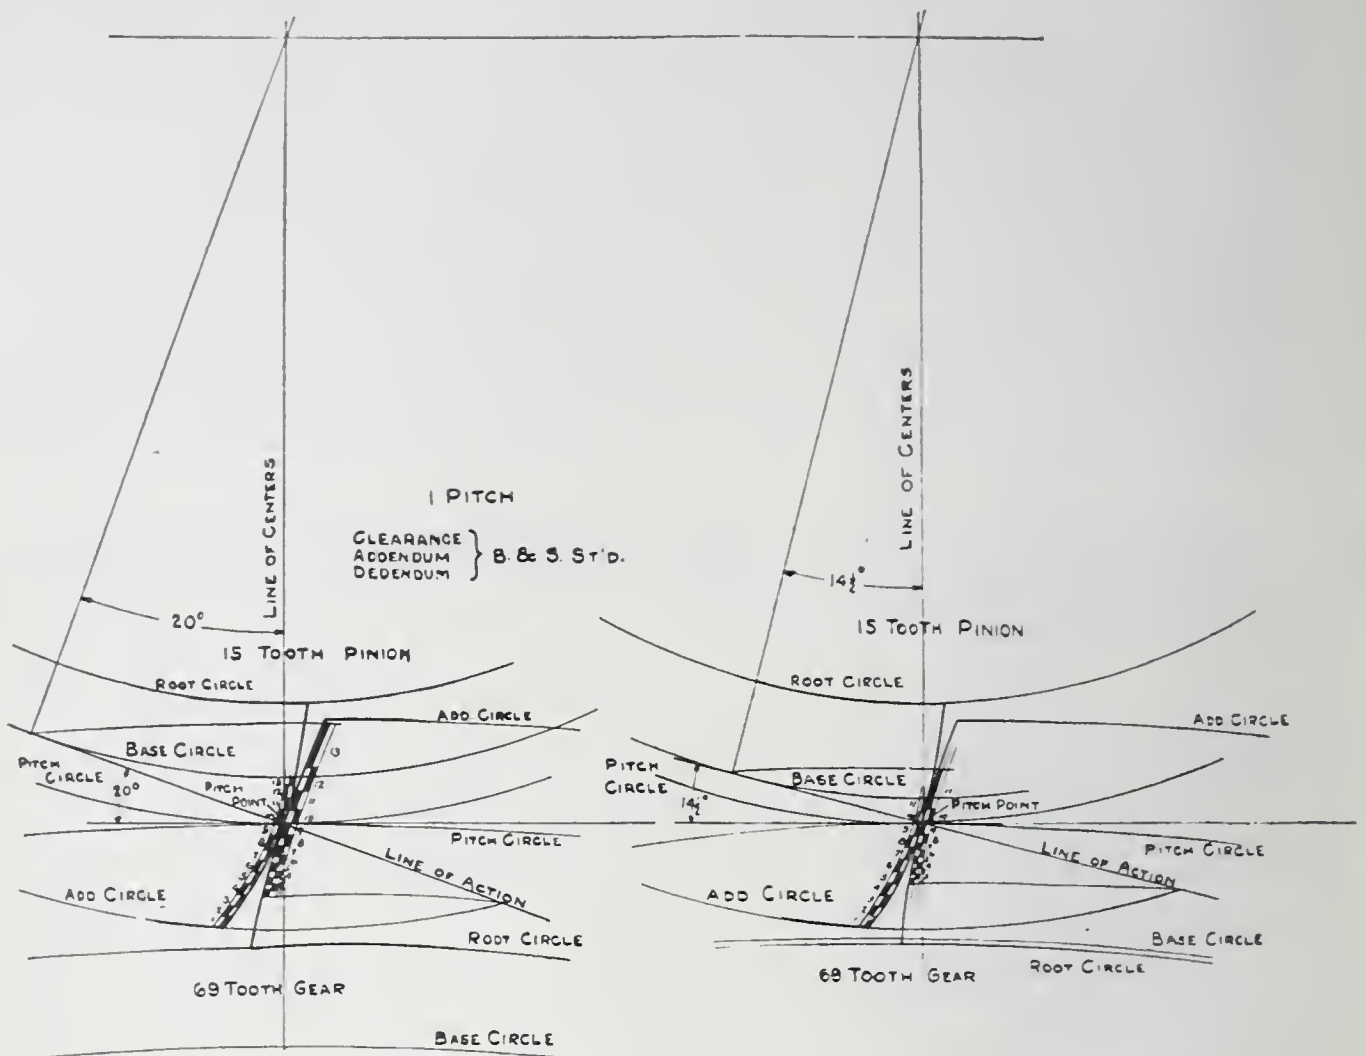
Outlines and Positions of Involute Gear Teeth.
